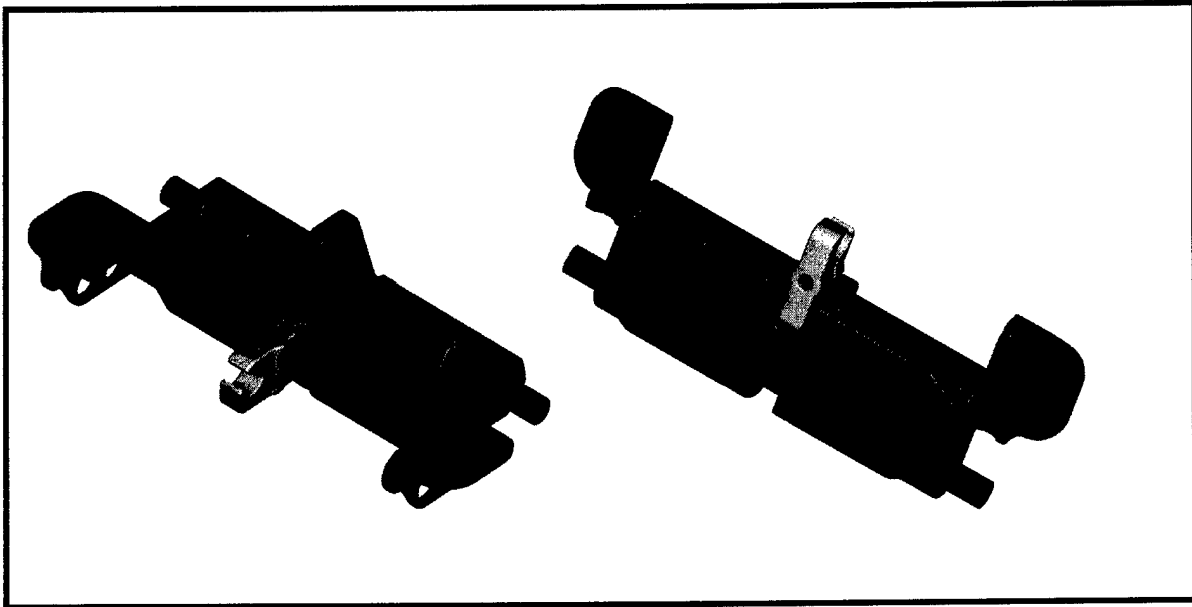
Big Block 4 Track Concept (single body, double pin, drive on steel end connector) with Titanium Shoe and Pad Plate Material (top and bottom view)
